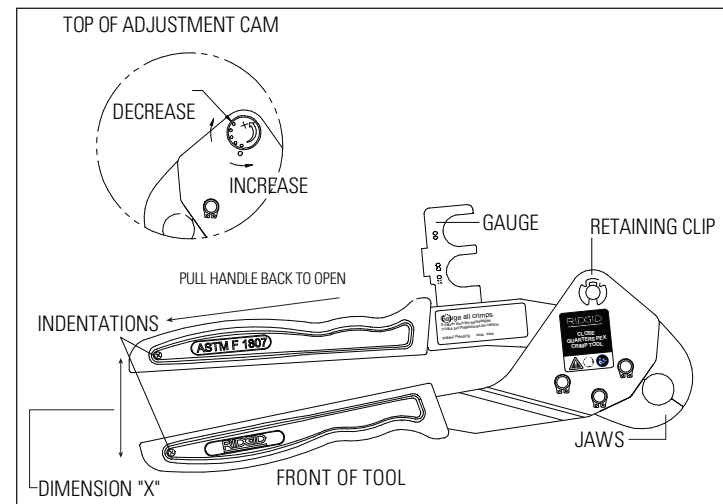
ASTM F1807 Close Quarters Manual PEX Crimp Tool
